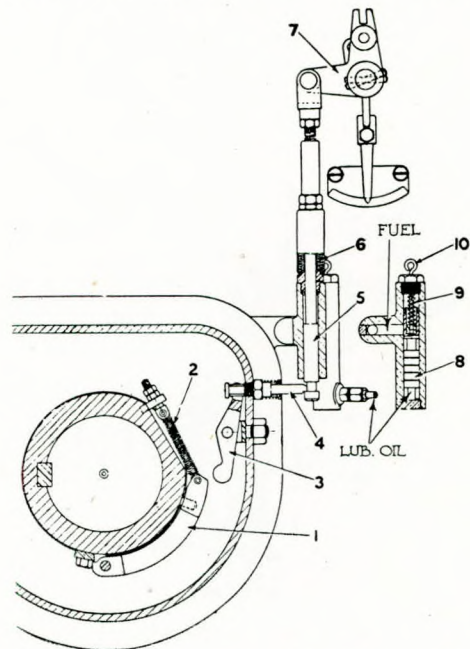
shows the Blackstone controls for excessive speed and failure of lubricating oil pressure.
